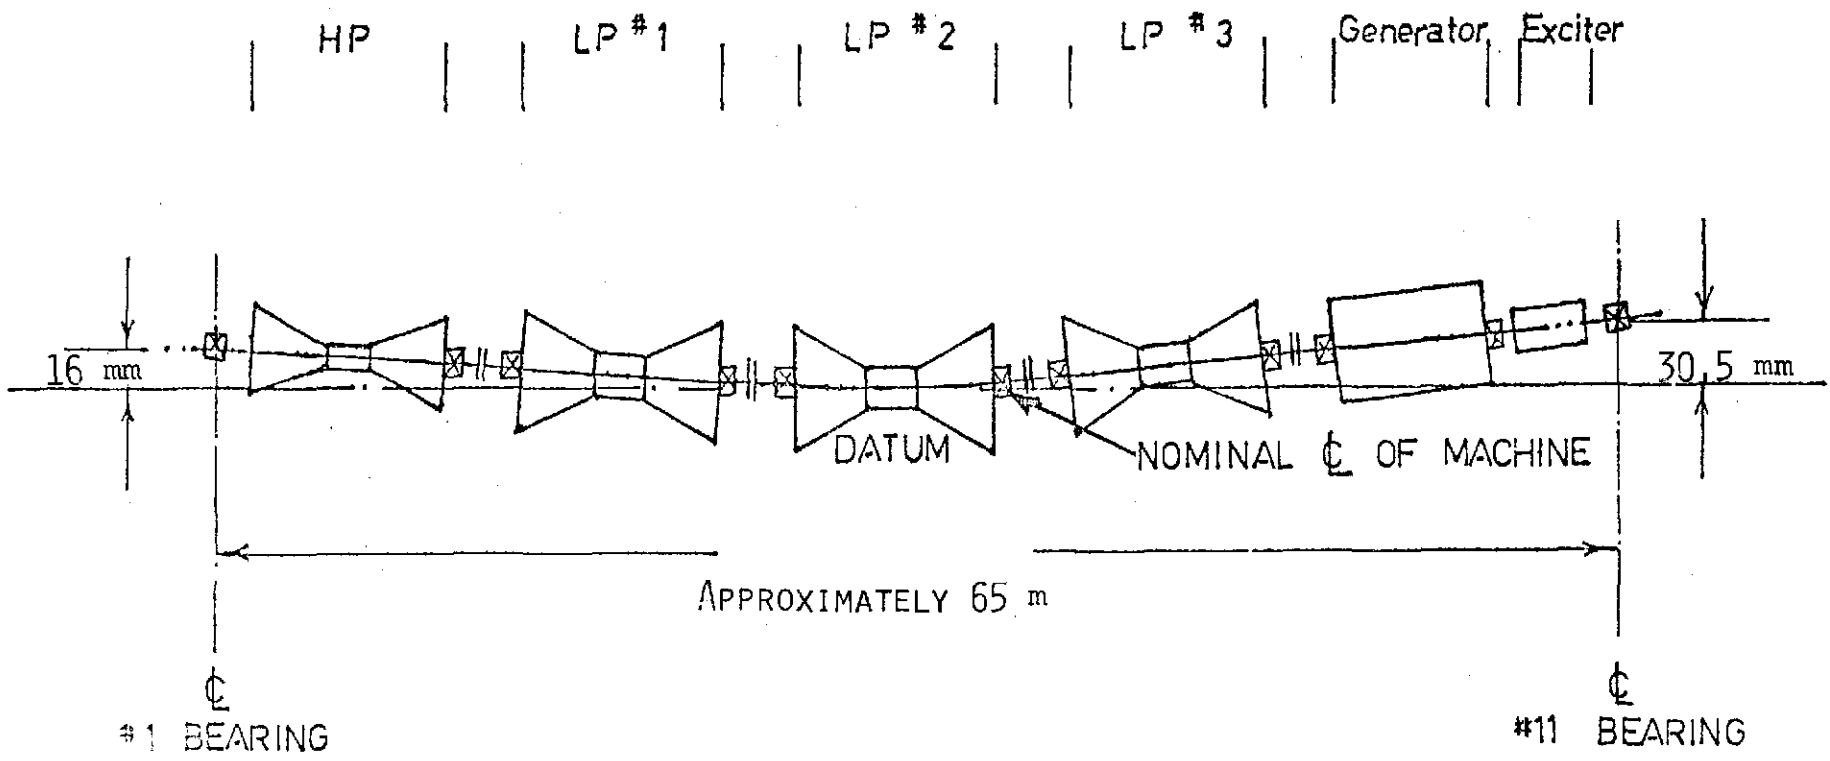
shows the general arrangement of a large saturated steam turbine with one HP cylinder and three LP cylinders tandem compounded. The rotor in each cylinder is supported by one bearing at the end of each rotor and the coupling between each rotor occurs between adjacent turbine bearings. This allows the flexibility of each rotor to be independent of the other rotors and enables independent balancing and removal of each rotating element. Since each shaft has an elastic deformation due to gravity the entire line of shafting must lie on a curve and the bearings are lined out to suit this static deflection or "catenary" as it is called. Although it should be obvious, it is worth mentioning that the center of rotation for the unit is the center of this catenary rather than a horizontal line. The couplings between individual shafts are therefore aligned to join the shafts in this catenary. Figure 7.2 shows the type of bearing and coupling alignment used to reflect this catenary and compares it to the alignment which would exist if the shafts were mounted horizontally.
